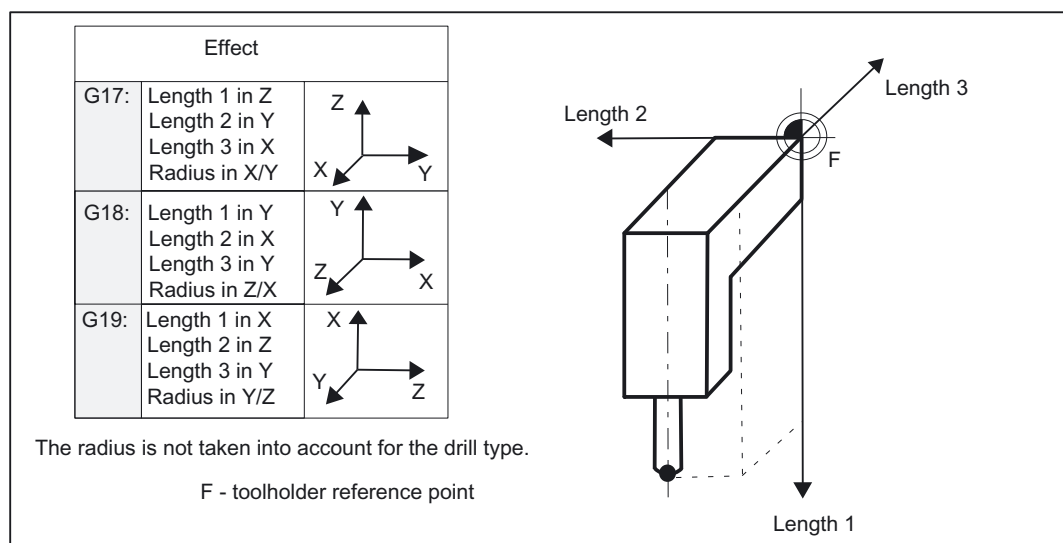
Effect of the tool length compensations, three-dimensional (special case)
